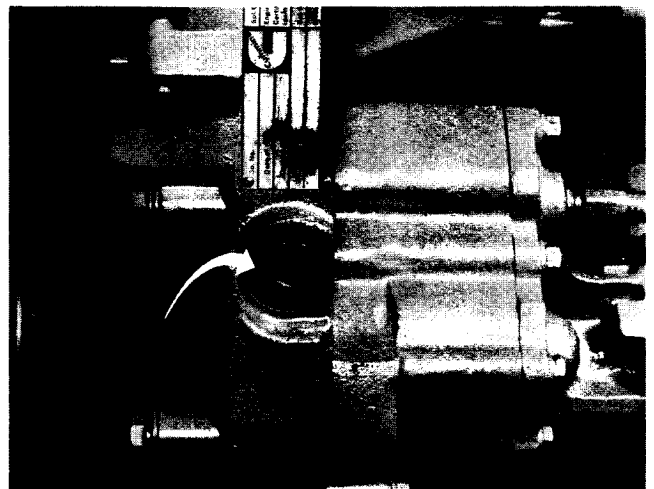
, (N11985). Lubricating system priming point — N/NT-855 Engine
